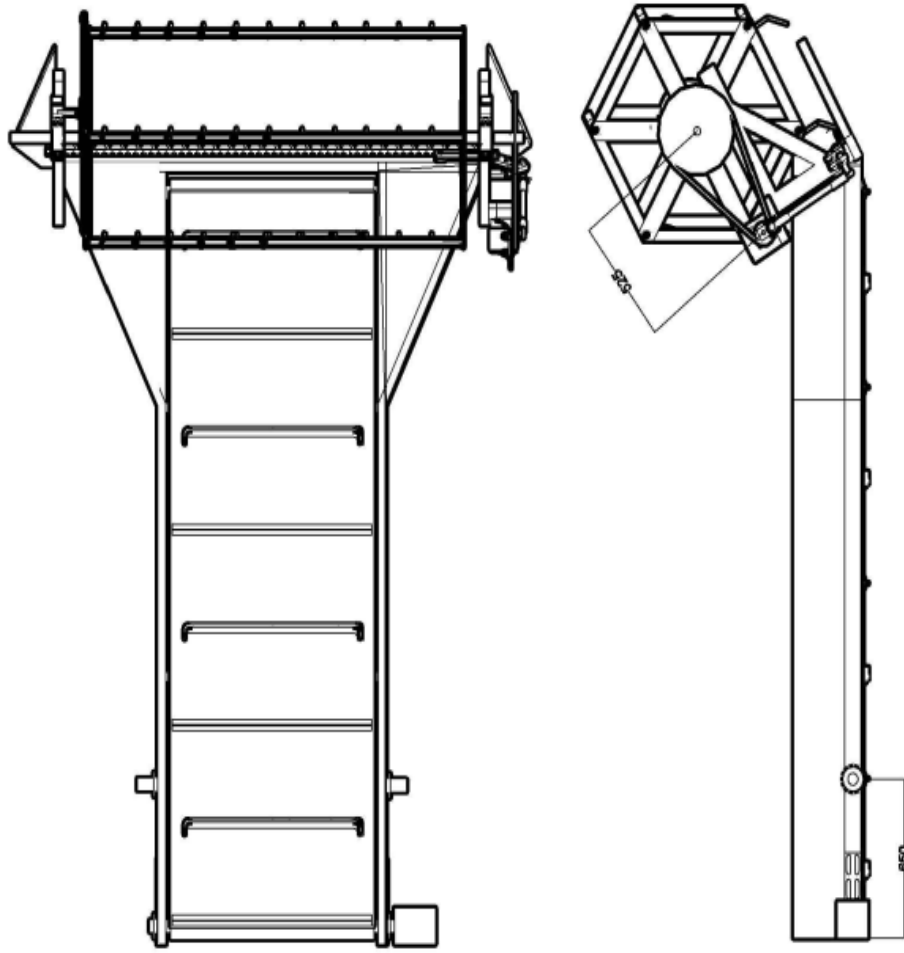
Front conveyor with Reel and cutter bar assembly of the KAU Pokkali paddy harvester
